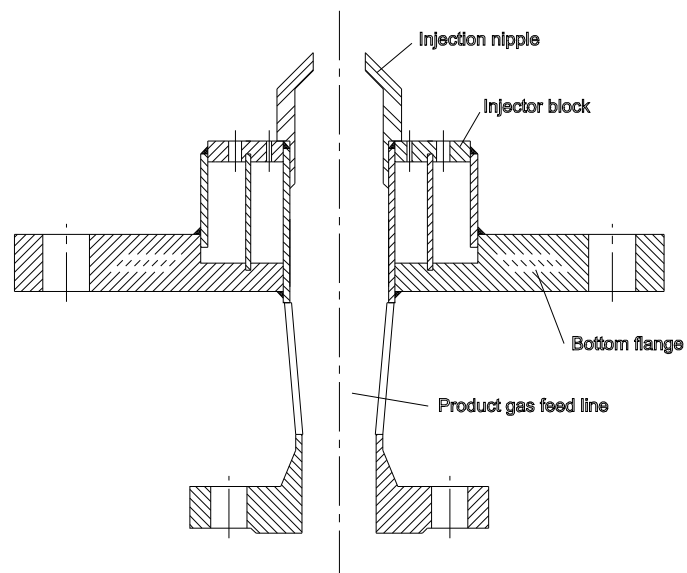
Cross section of the injector block and construction flanges. Feed openings to injector block chambers are not shown.
